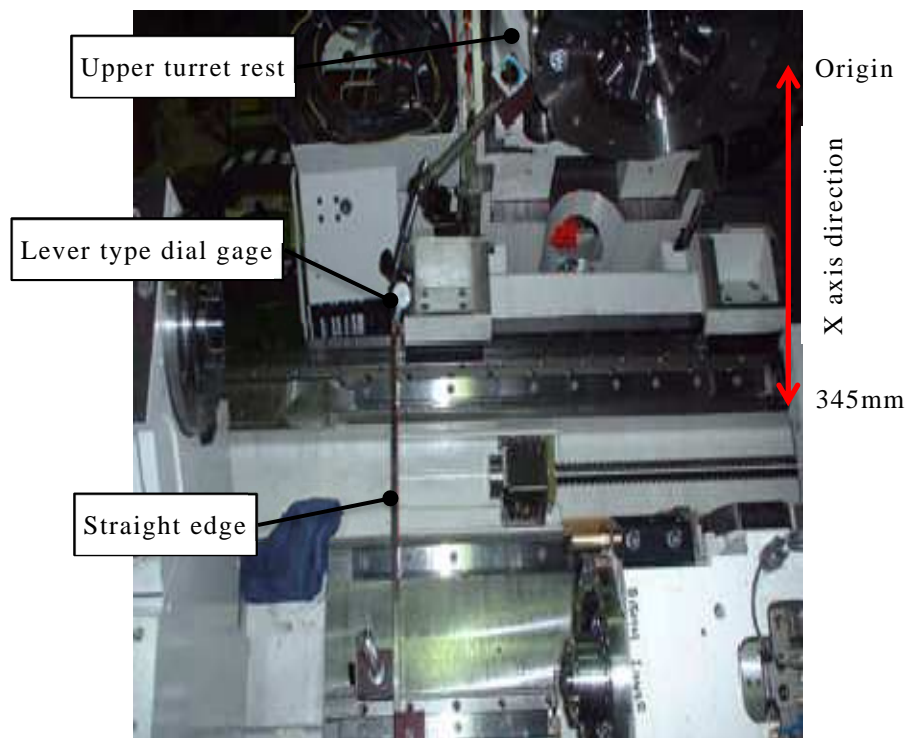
Measurement of Y axis displacement at cutting edge position of prototype tool post scenery
